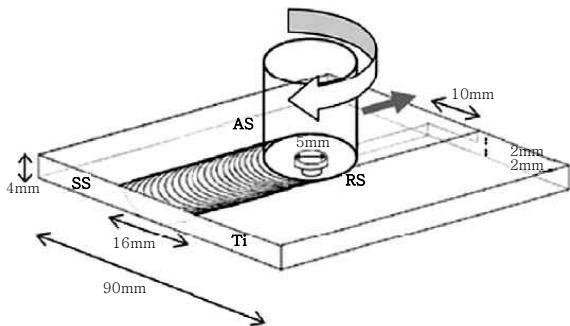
Schematic diagram showing the geometry of a dissimilar 304SS/CP-Ti lap design using a double-shoulder tool¹⁾
